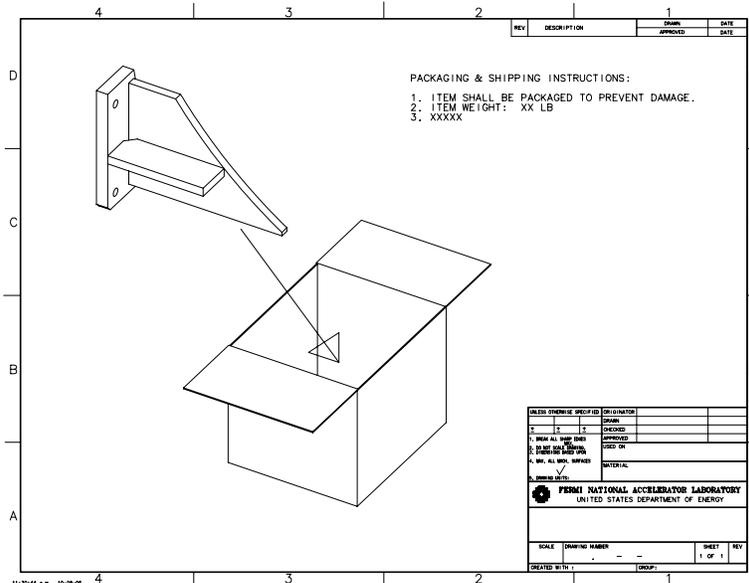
Example of a Non-Item Master Drawing (Packaging Drawing Shown)
